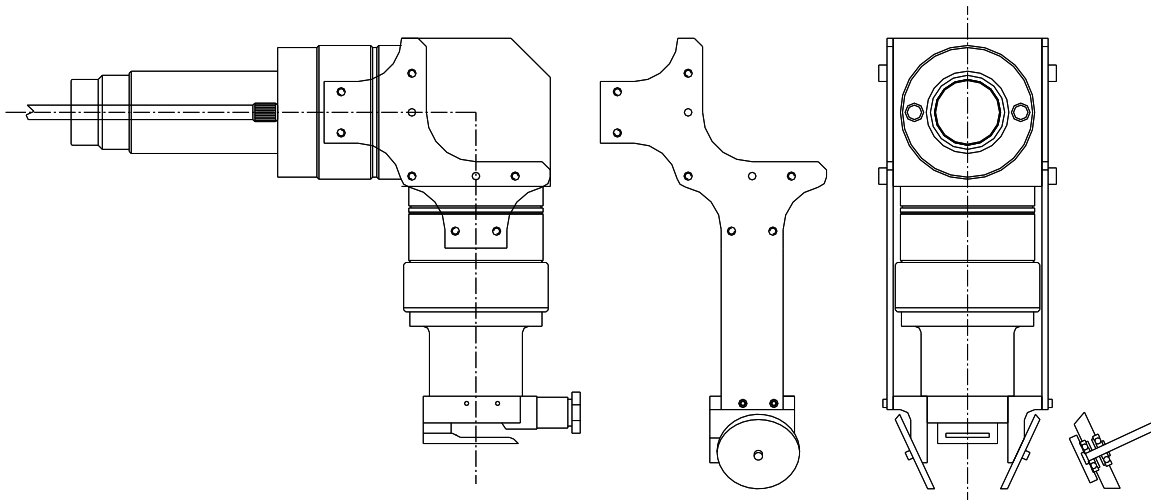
A schematic of a layout of a handheld laser tool utilizing two wheels for clamping the workpiece during butt welding.
